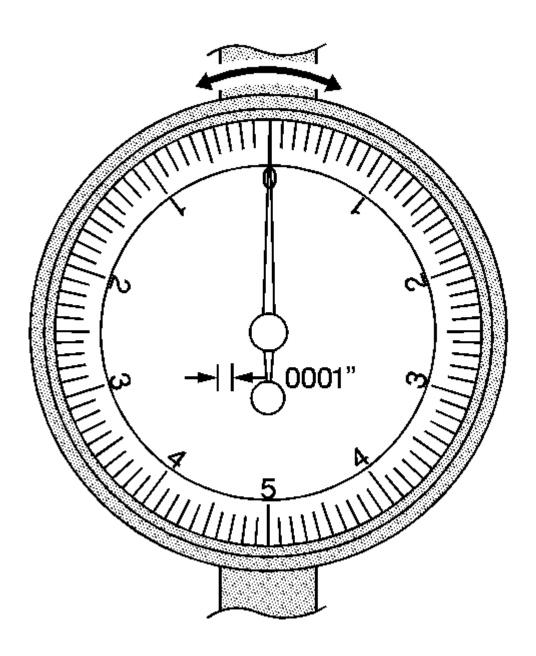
Dial Indicator Courtesy of GENERAL MOTORS CORP.
